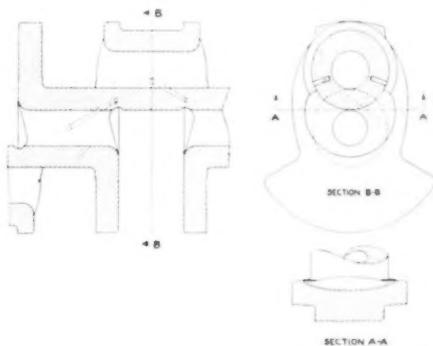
Sketch of modern cast crankshaft design showing stress-relieving pocket.
